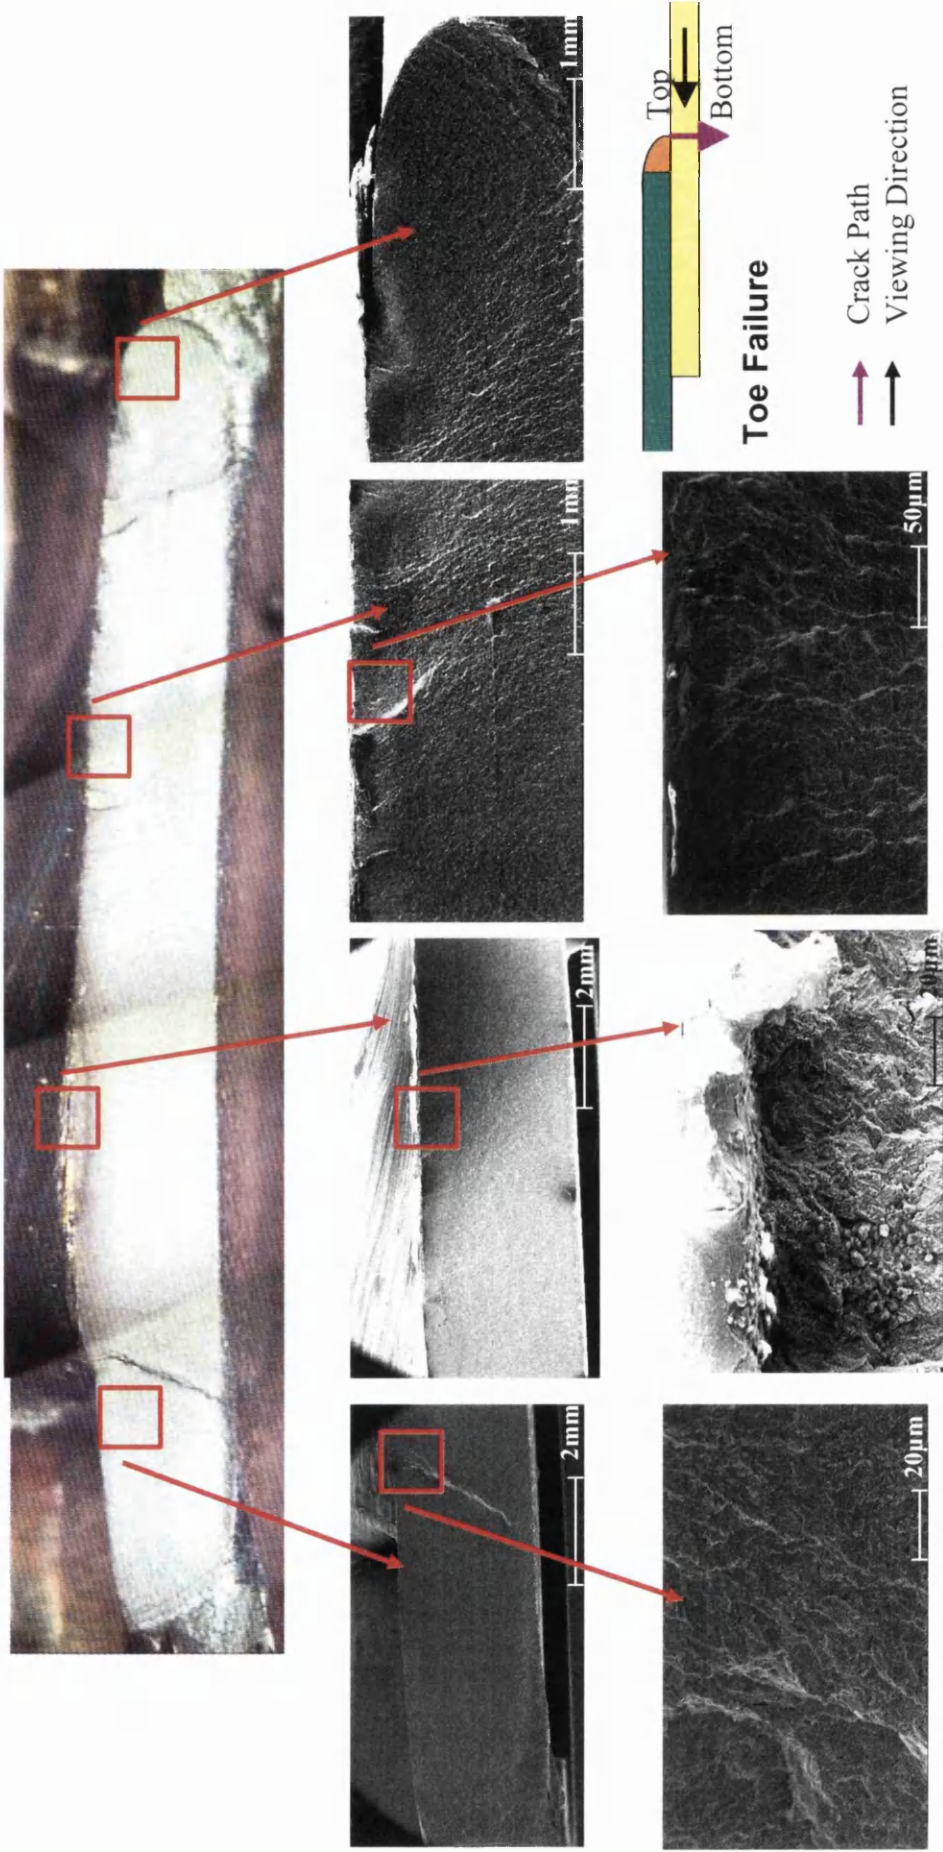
Typical Fracture Surface for Variable Amplitude SAE Bracket Load-Time History TM11A Weld Toe Failure – Weld View
